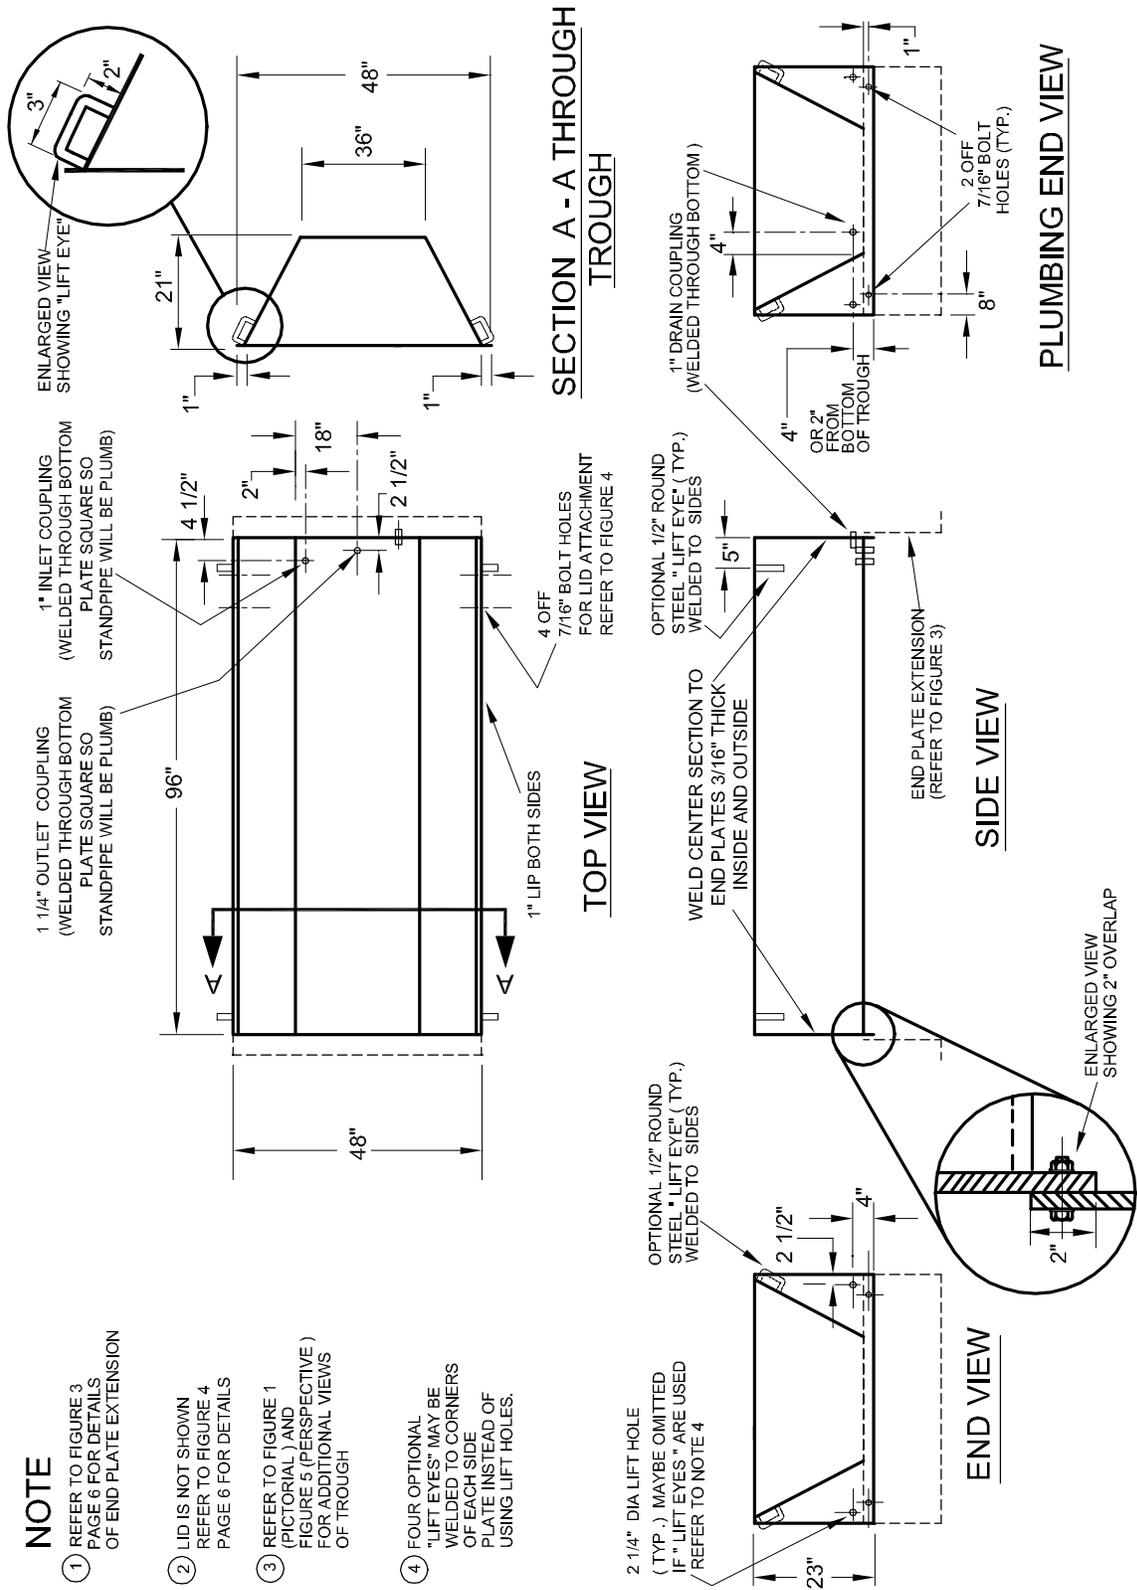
TROUGH CENTER SECTION AND END PLATES C/W EXTENSIONS
